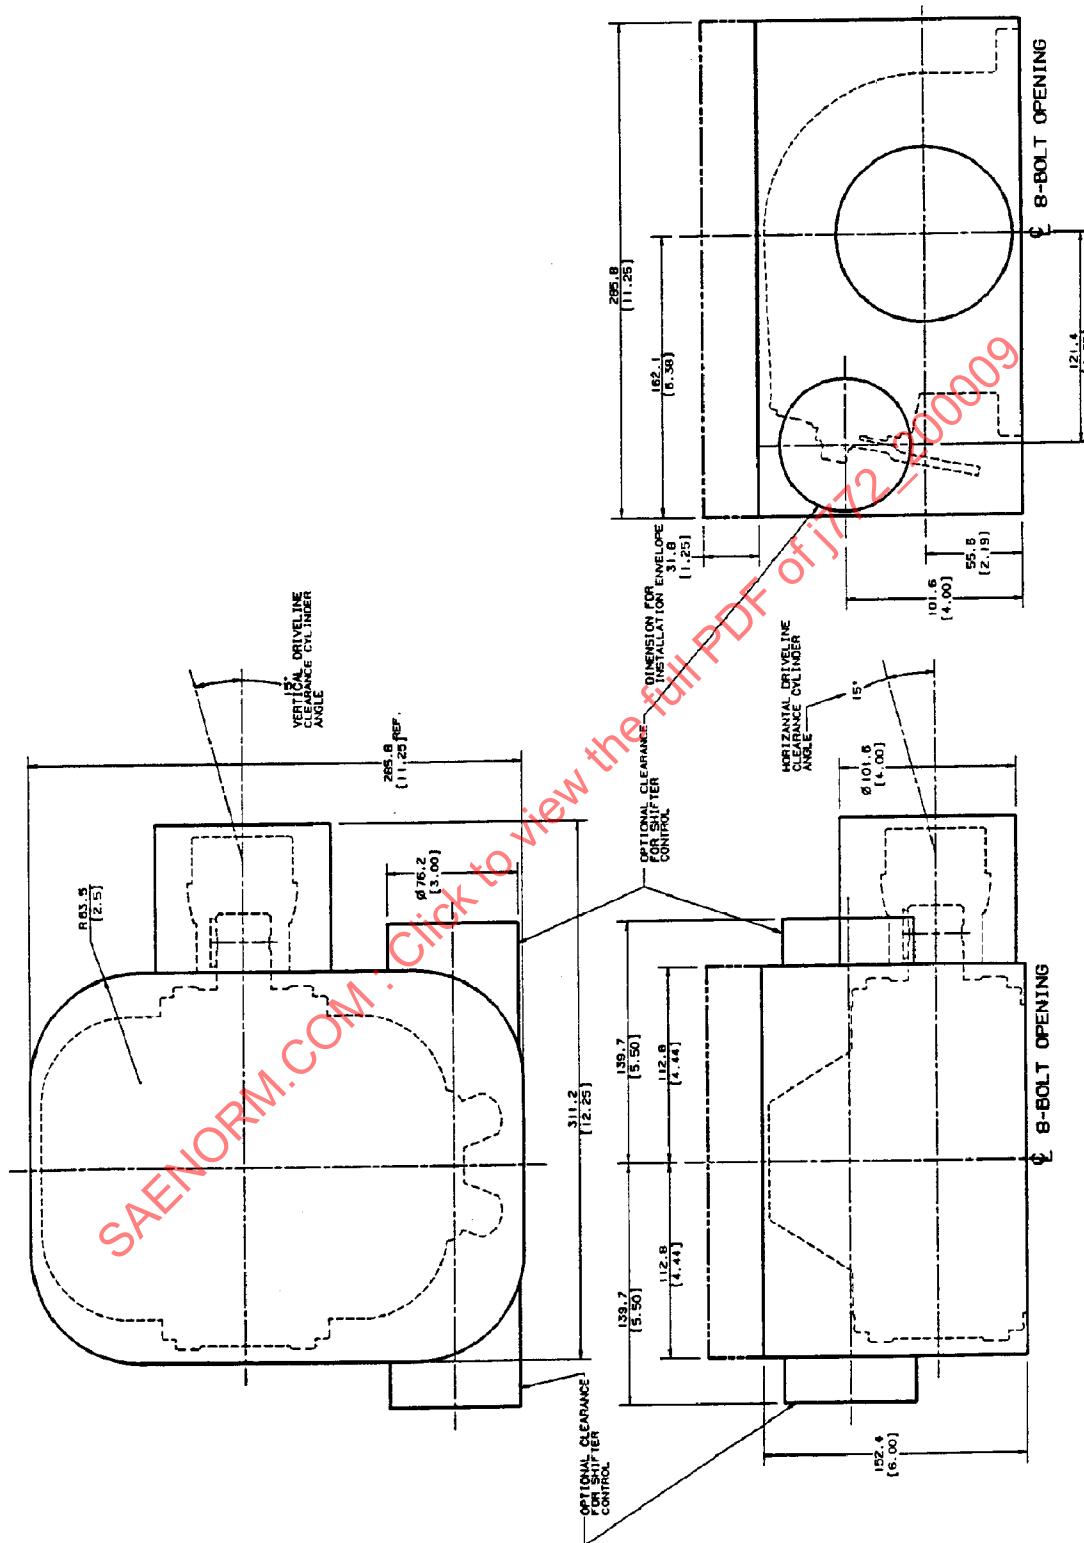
TYPE V—SINGLE GEAR, EIGHT-BOLT P.T.O.
